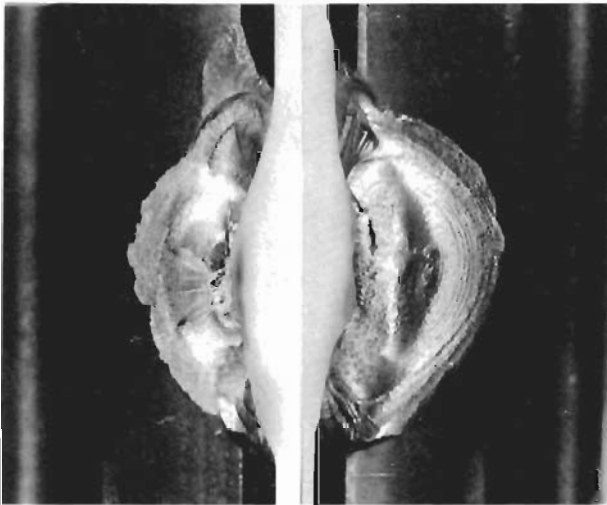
Spur pinion tooth, 2 \times . Bidirectional tooth bending fatigue, with applied loads at a high spot at the top edge on both sides. Origin is at the case/core interface, near the crown of the tooth.
